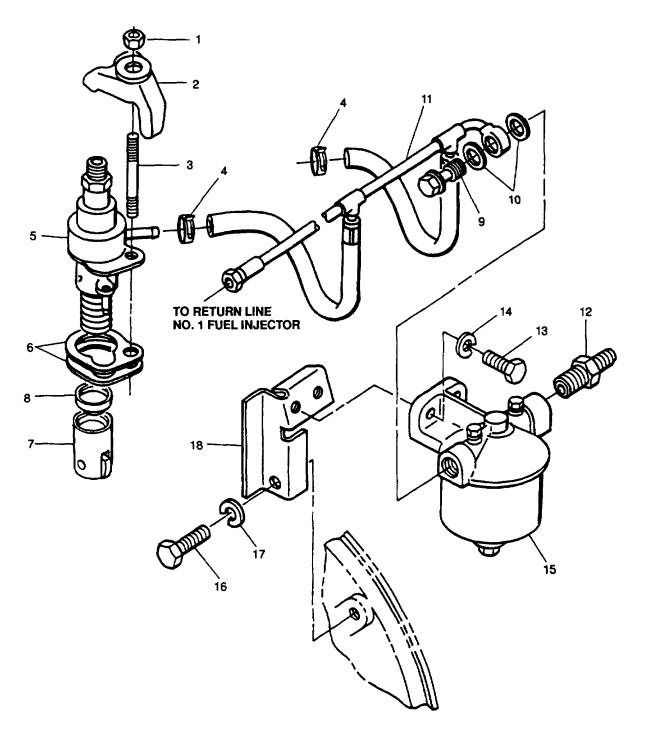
Fuel Injection Pump, Fuel Filter, and Supply Lines
